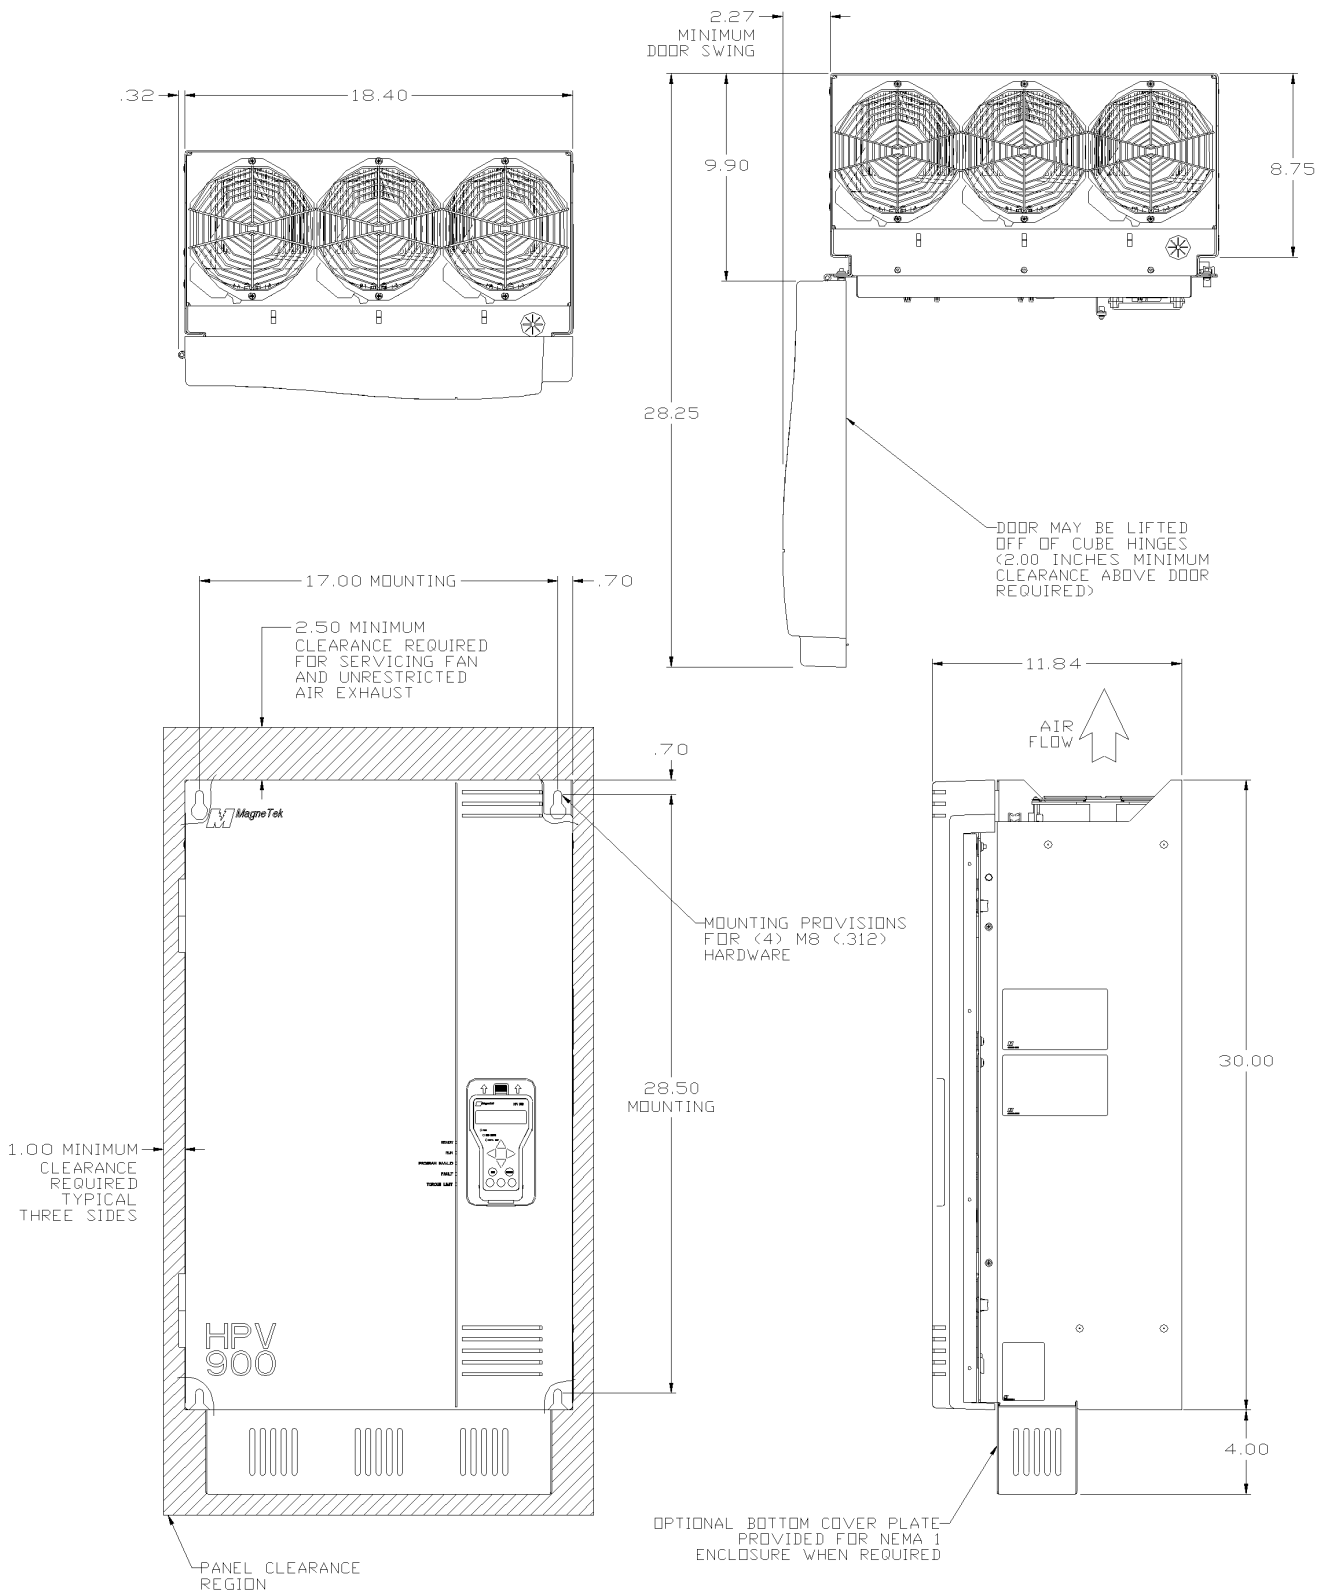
3 - B+ cube Dimensions and Mounting Holes
